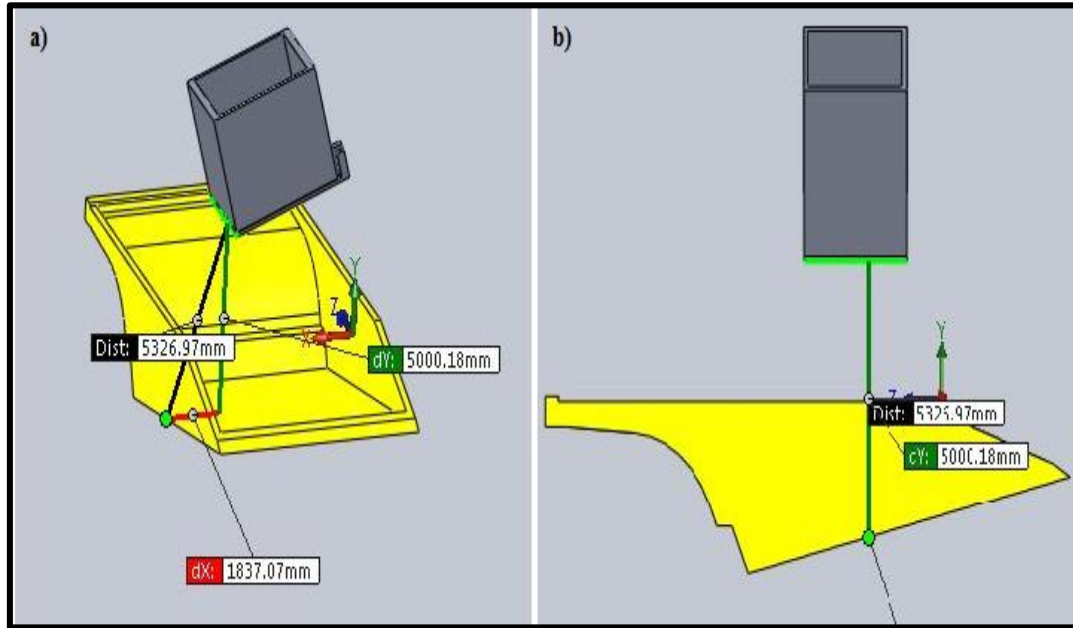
Truck Body and Shovel Dipper CAD Assembly for $H_t = 5.00$ m (5000 mm):
